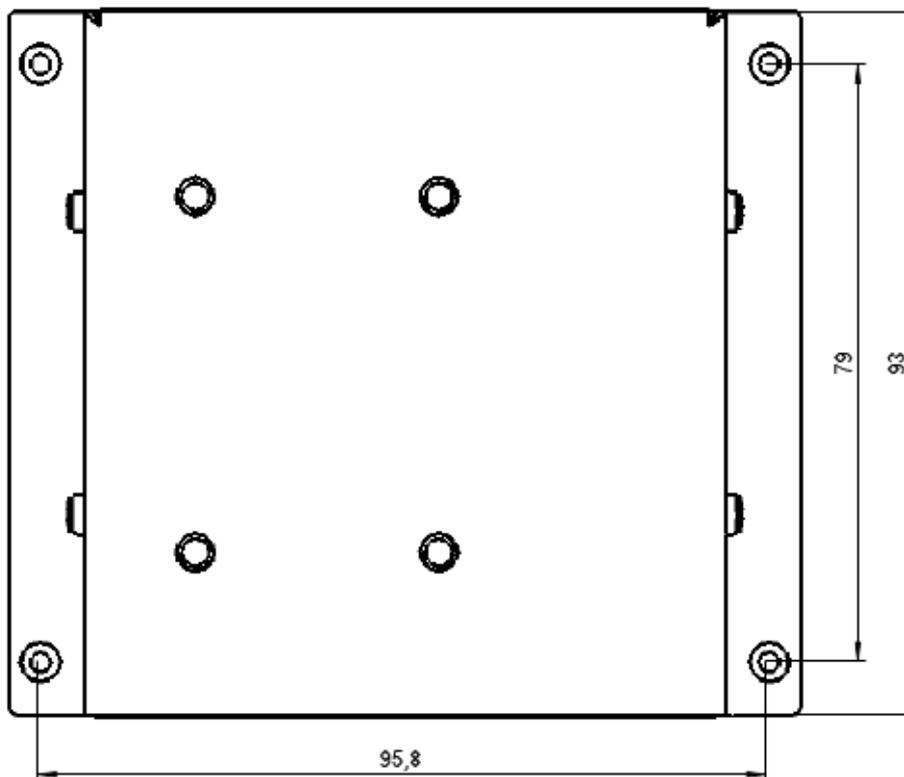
E-870.xG dimensions, mounting rails with M3 holes
